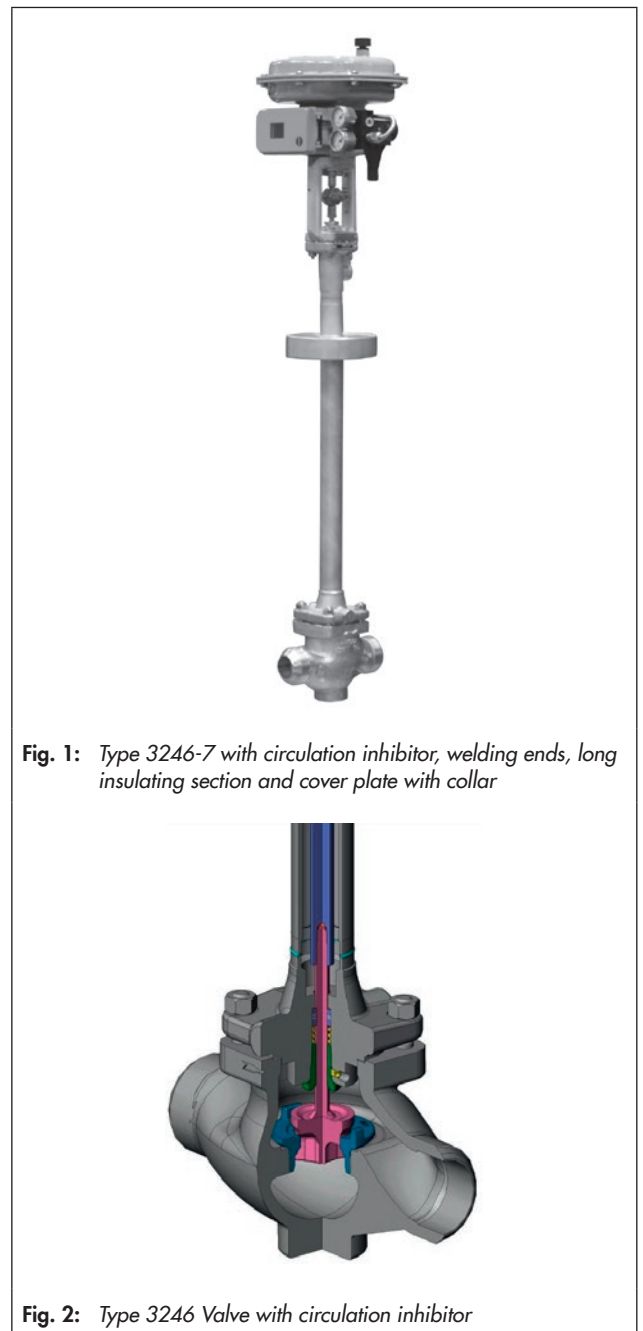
Type 3246-7 with circulation inhibitor, welding ends, long insulating section and cover plate with collar
